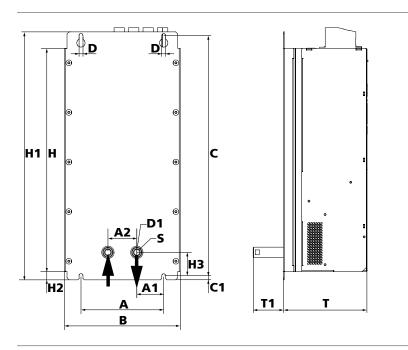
Dimensional drawing, housing with liquid cooling, schematic depiction for BG3 to BG6a
